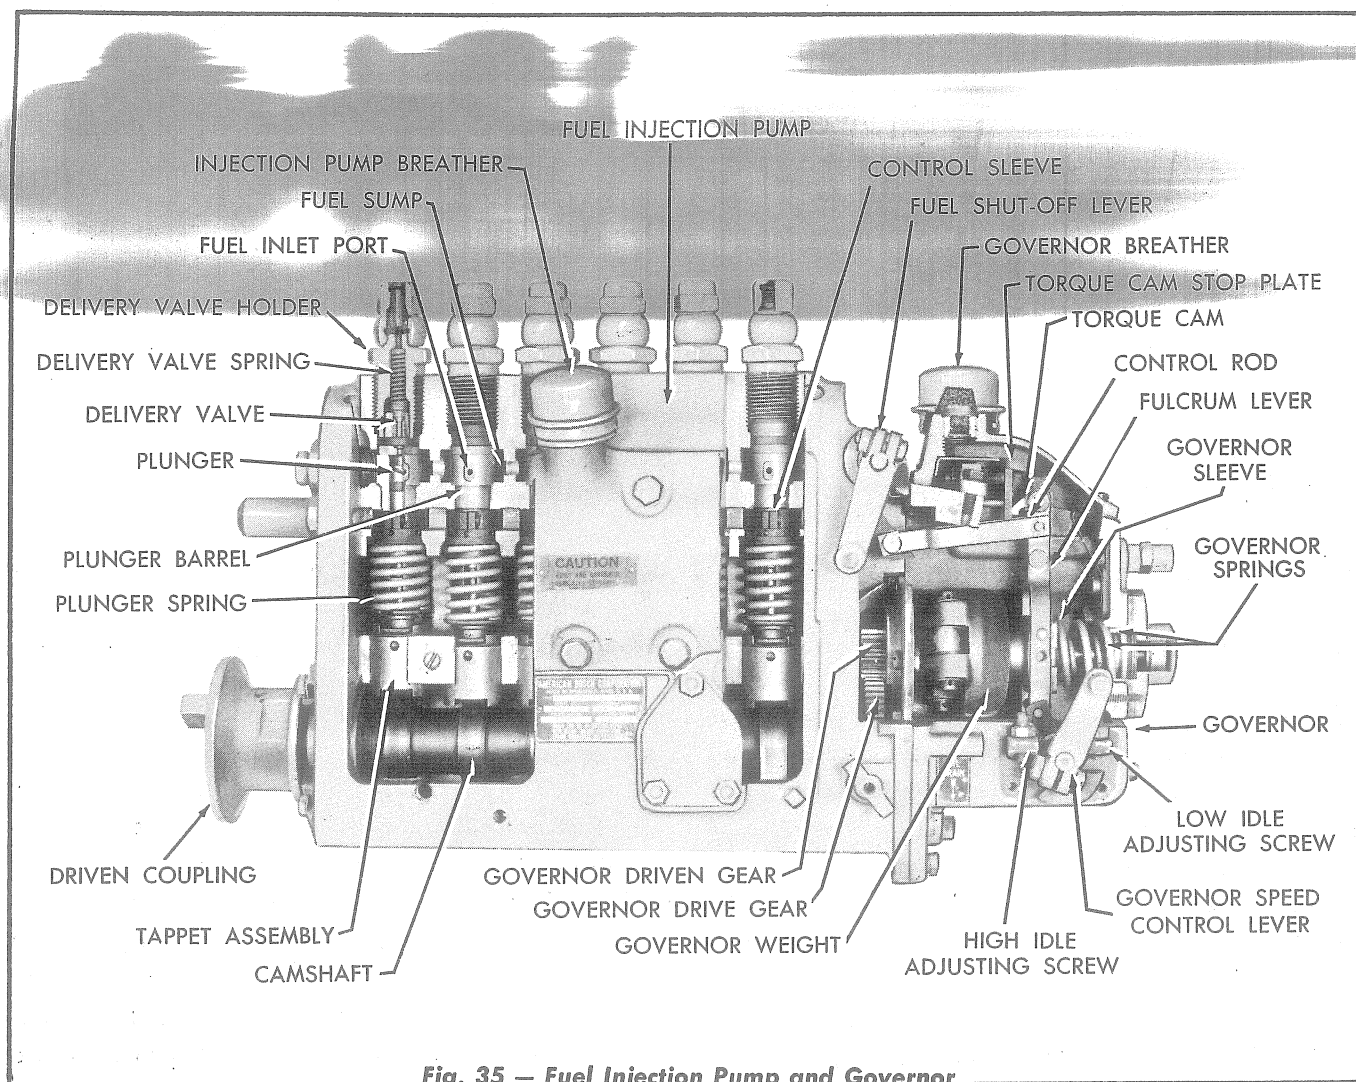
Fuel Injection Pump and Governor Assembly — Sectional View (Early Model Pump Shown — Later Models Similar)
